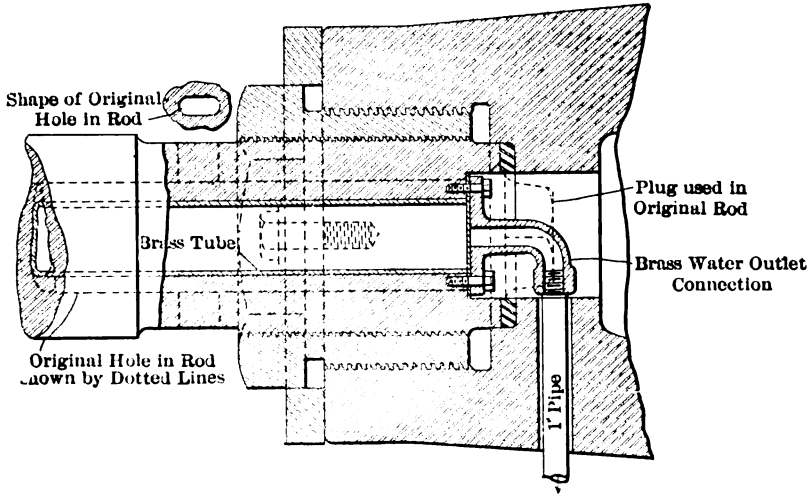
SECTION SHOWING PISTON WATER OUTLET AND MAIN CROSS-HEAD CONNECTION
